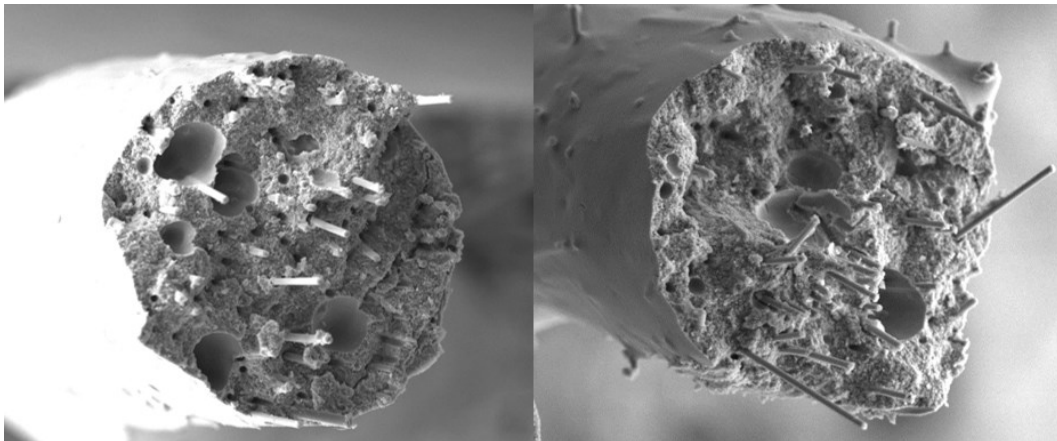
Fracture surface of a single green filament of $Al_2O_3 - C_f$ paste, extruded through conical (left) and 25 mm (right) 0.41mm diameter nozzles, demonstrating superior fibre alignment using the conical nozzle.
